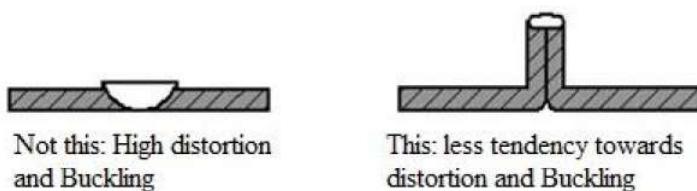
A short-flanged butt joint is often preferable for joining thin material
